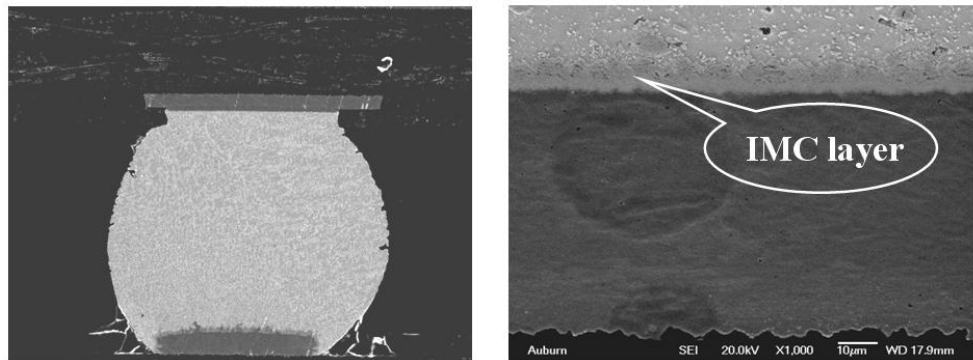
Inter-metallic Compound (IMC) at Solder Ball, Copper Pad Interface
